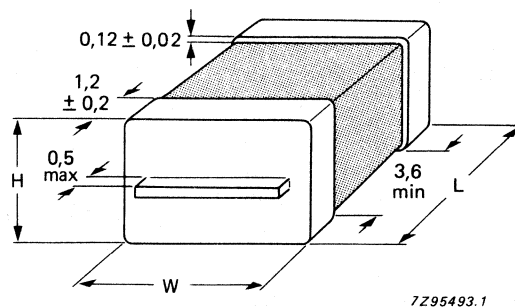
Capacitor outline; see Table 3 for dimensions H, W and L.
